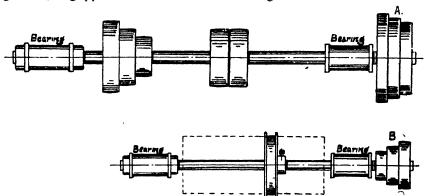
Auxiliary countershaft for grinding on the lathe
